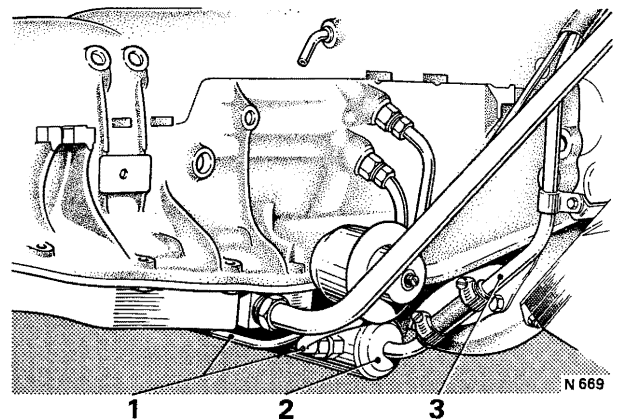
HEAT EXCHANGER FLUID PIPES (EARLY CARS)
